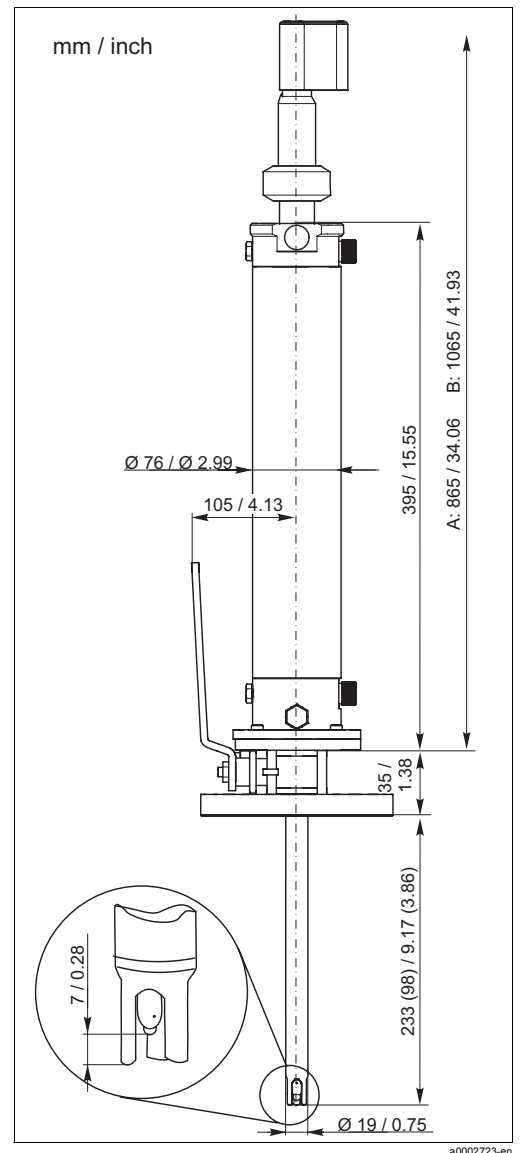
Assembly version: manual, long, for gel sensors, flange
